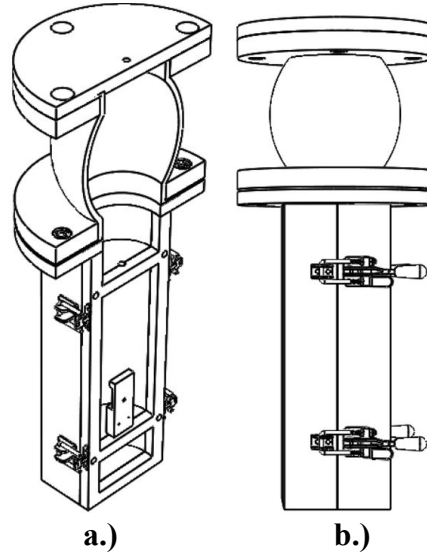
a.) Isometric view of open cryochamber and b.) side view of the same chamber.
